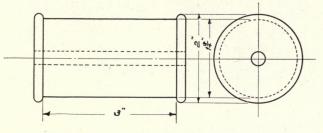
BOBBIN FOR STANDARD WINDING TEST
